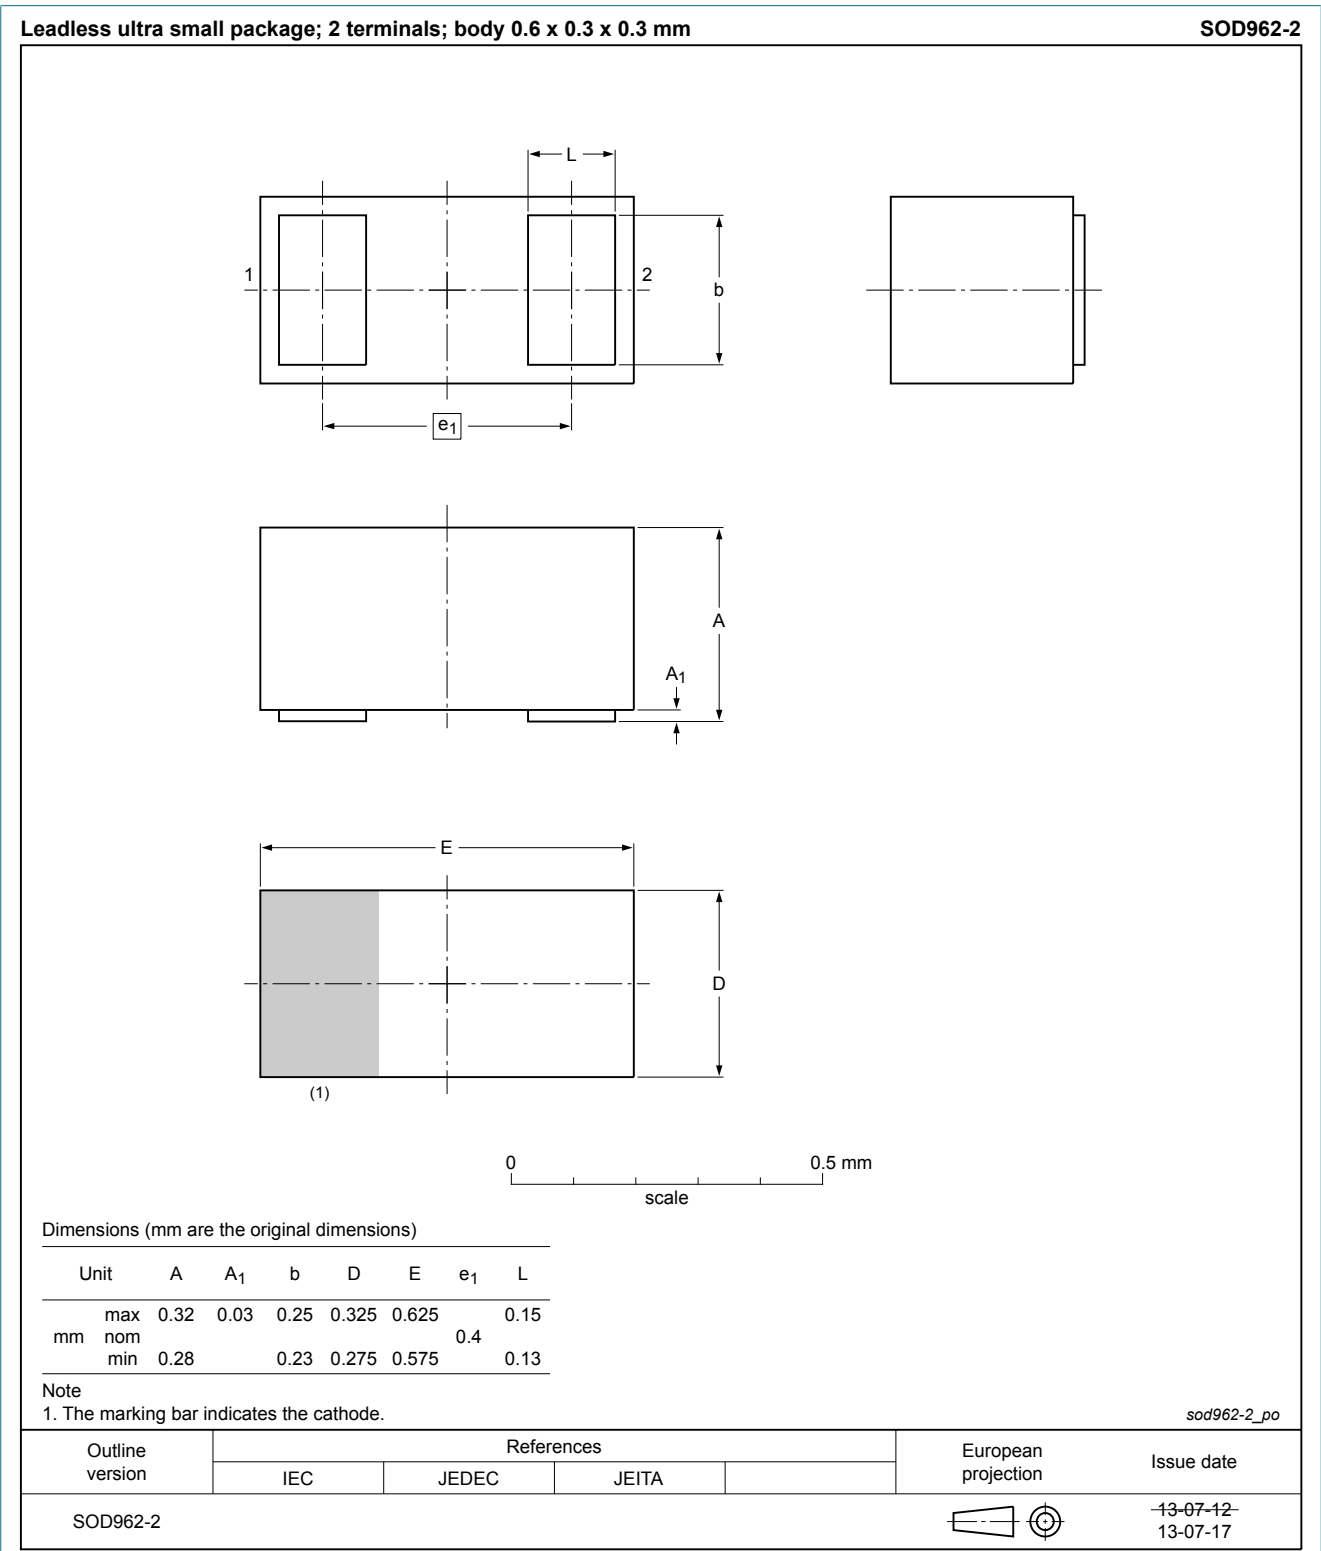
Package outline DSN0603-2 (SOD962-2)
